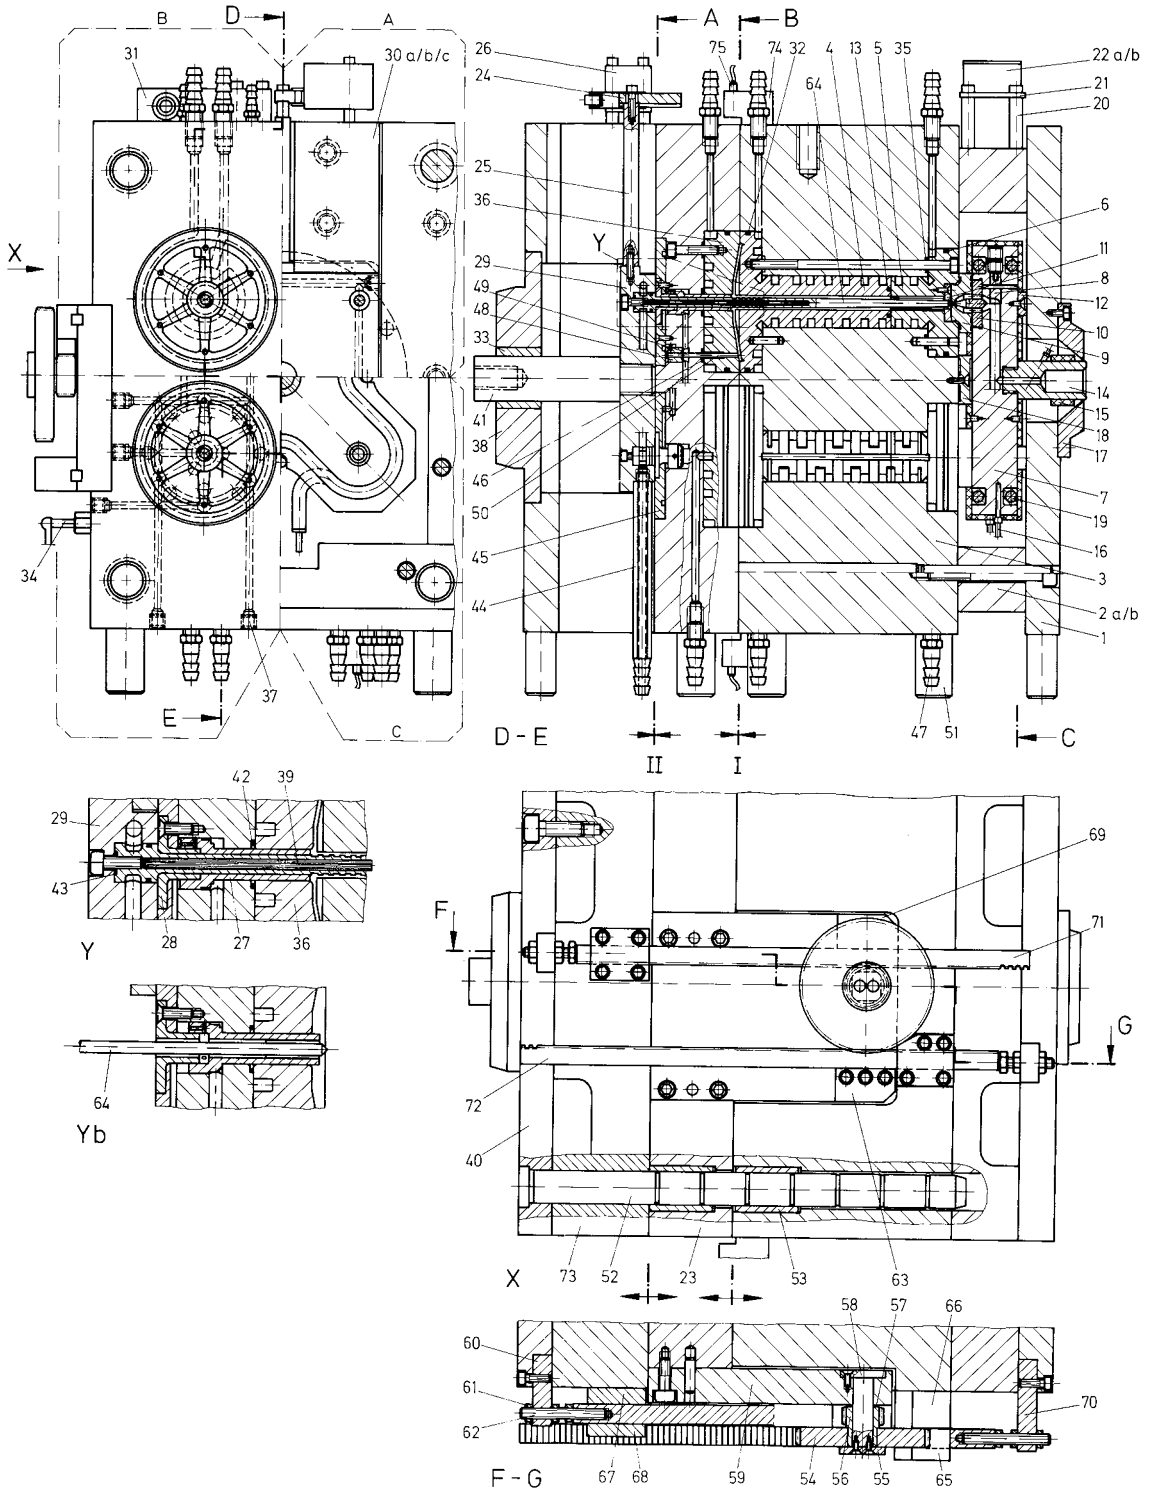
shows the arrangement of the cooling circuits as well as specific cooling data. Blind holes for housing the thermocouples (34) have been drilled in various places so that the temperatures of the mold plates can be checked during production.
